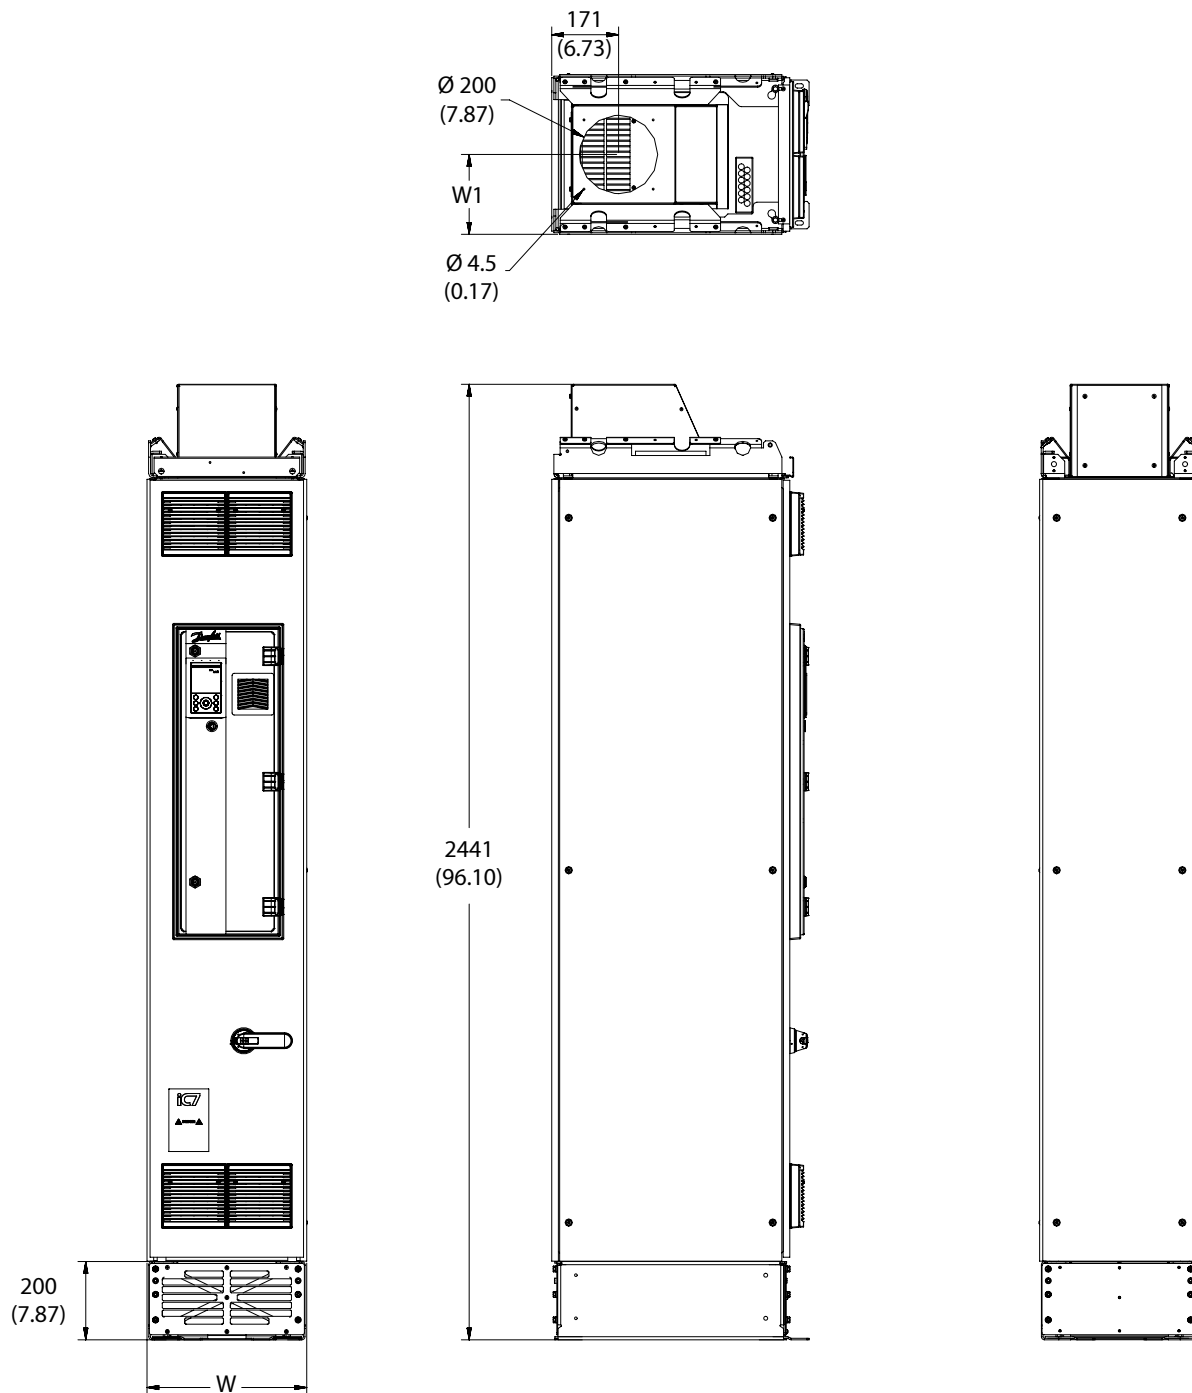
Dimensions for the Cooling Air Output Flange (+OAF), FE9, in mm (in)
